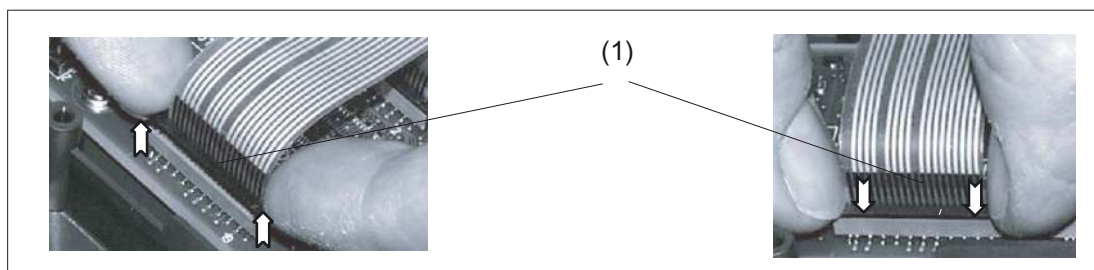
Removing (left) and attaching (right) a membrane connector
